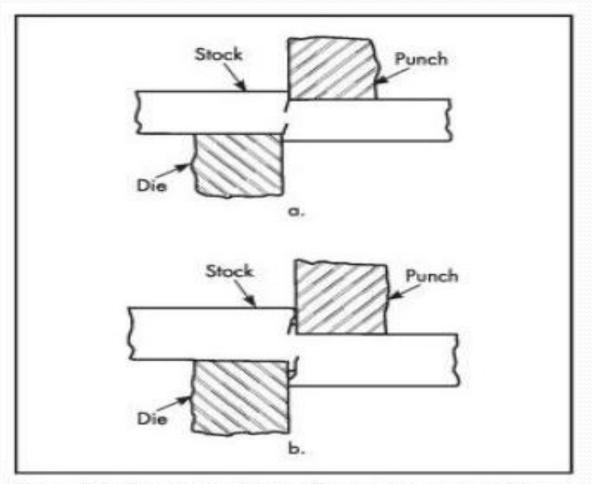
Cutting (a) with insufficient clearance. As fracture continues (b), rough tearing occurs and the fracture paths will not meet.
